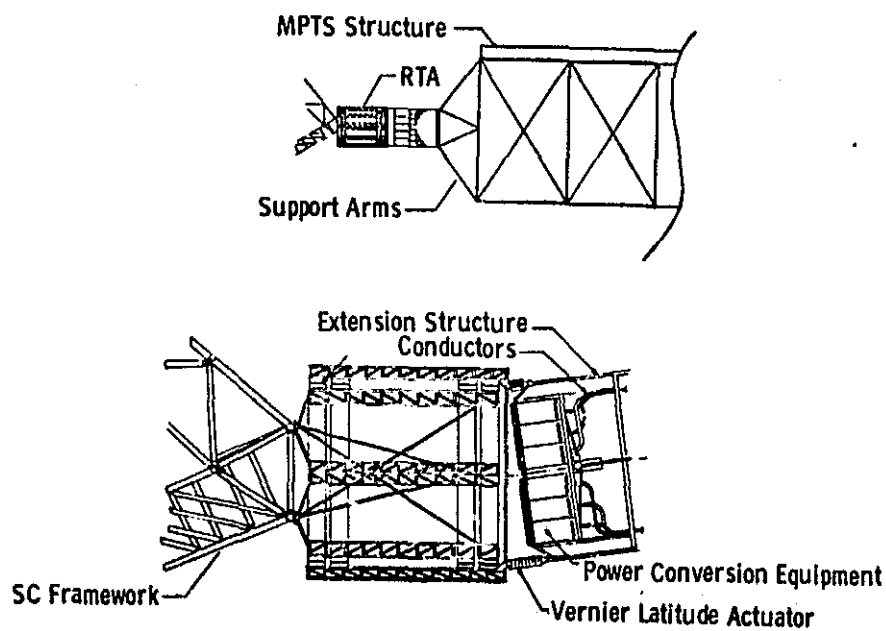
Thermal SPS - MPTS with Rotary Transformer Assembly
